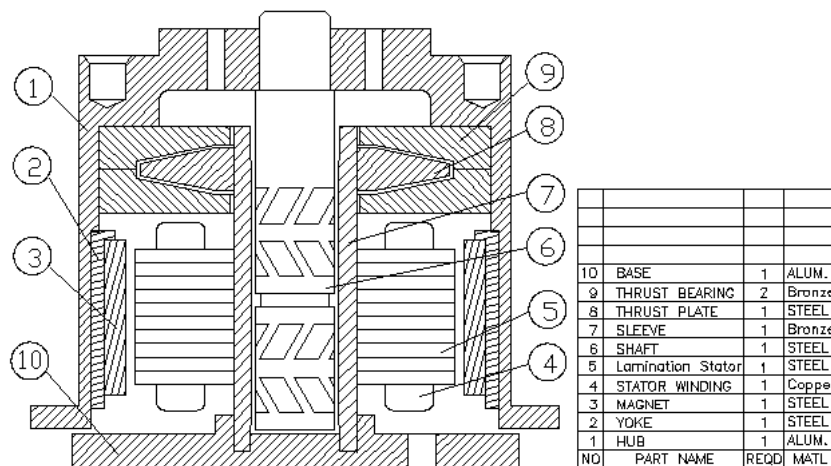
Schematic of hybrid design of fluid bearing system.
